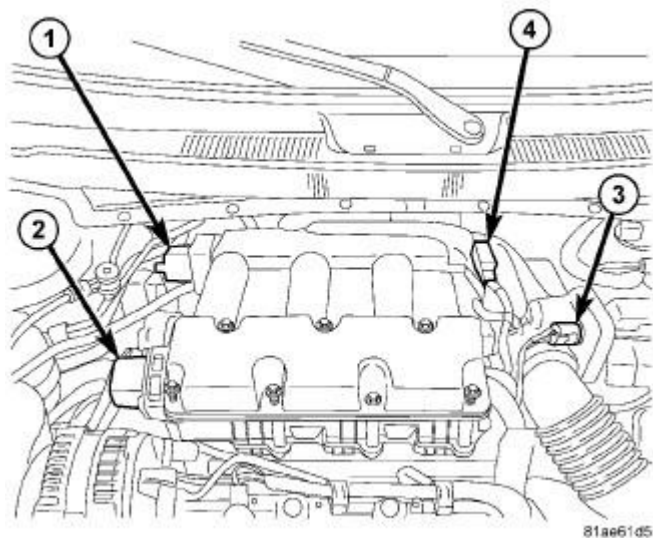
Identifying PCV Valve, EVAP Purge Solenoid, EGR Tube & Power Brake Booster
